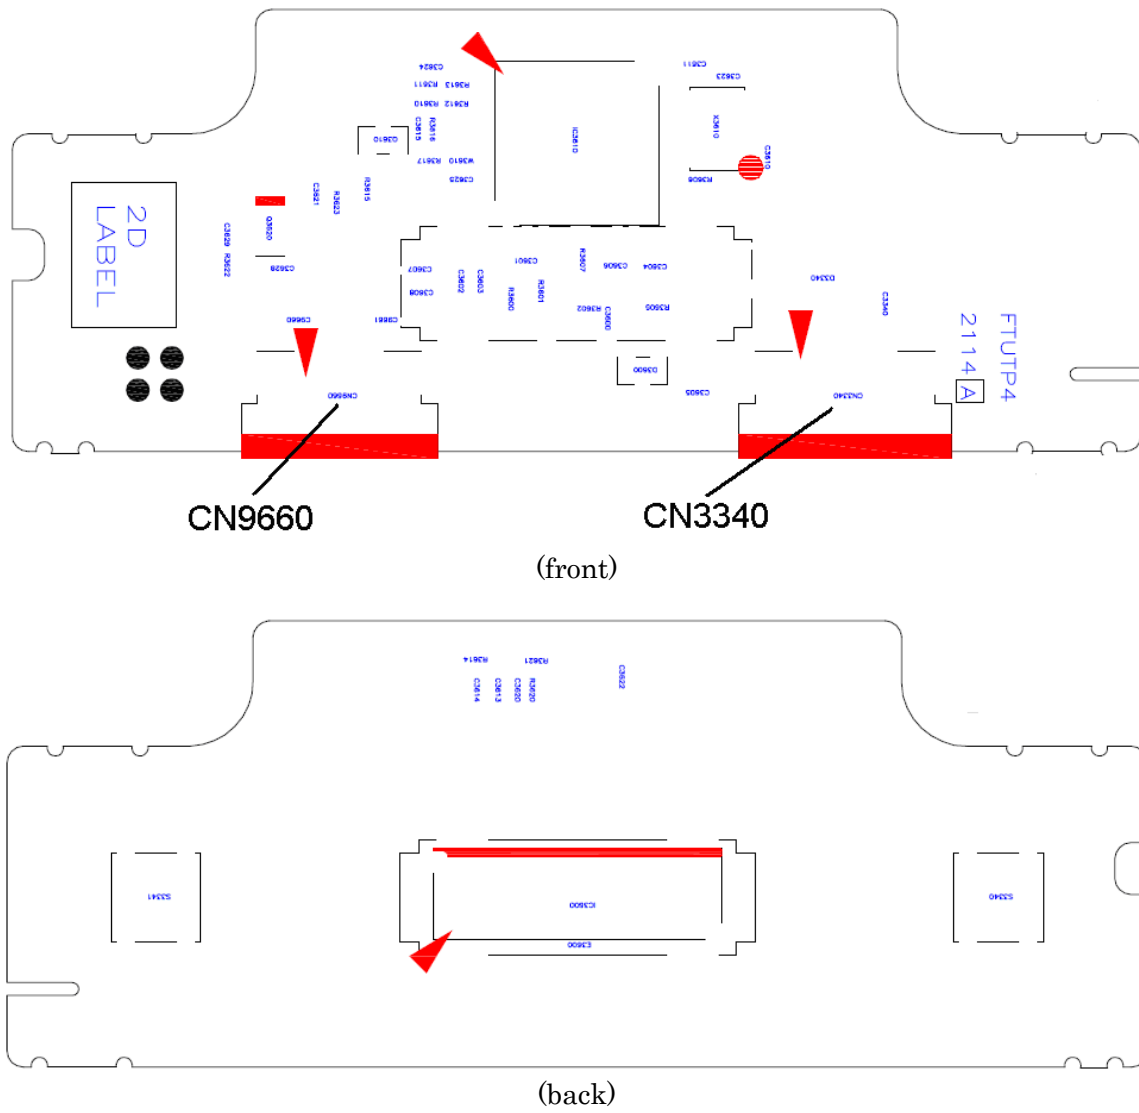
T-PAD/FingerSensor board (FTUTP\*) layout (front/back)
